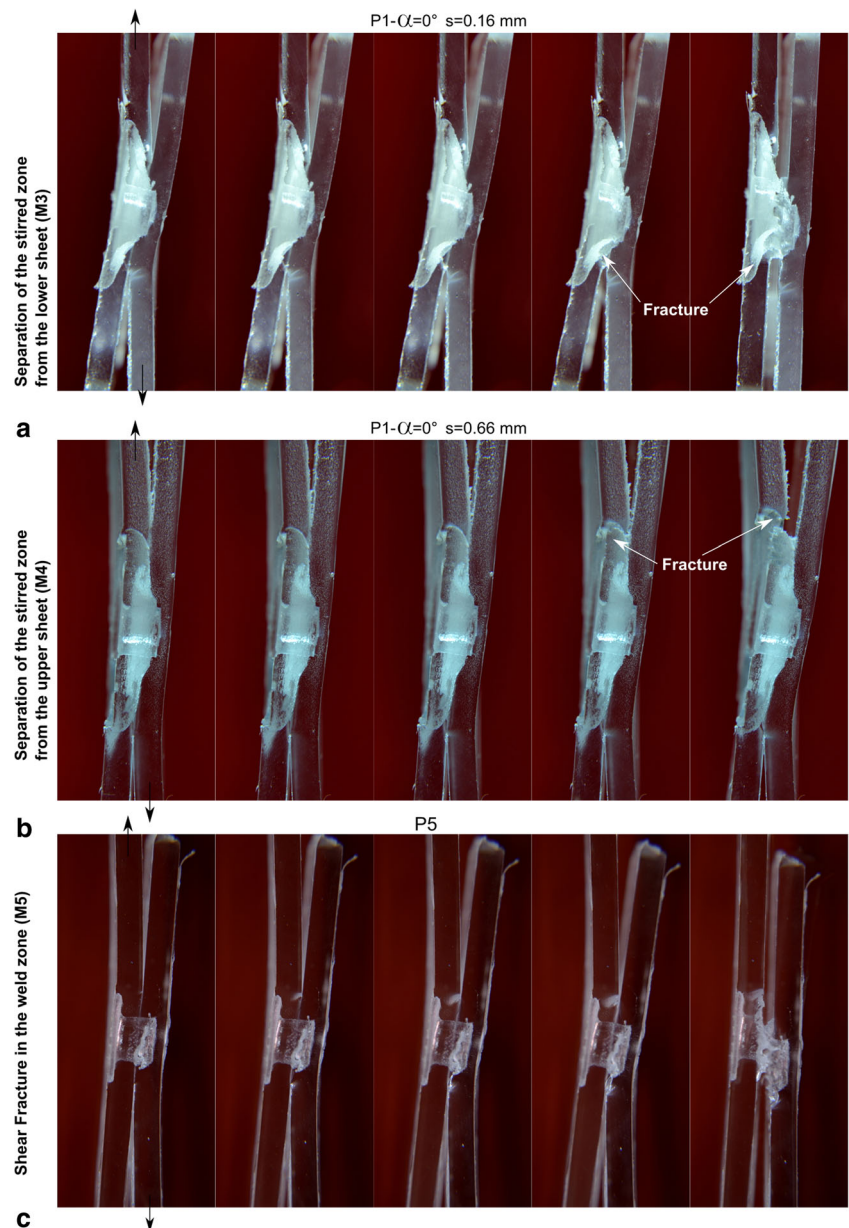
Fracture Paths: separation of SZ from a upper sheet, M4 and b lower sheet, M3
